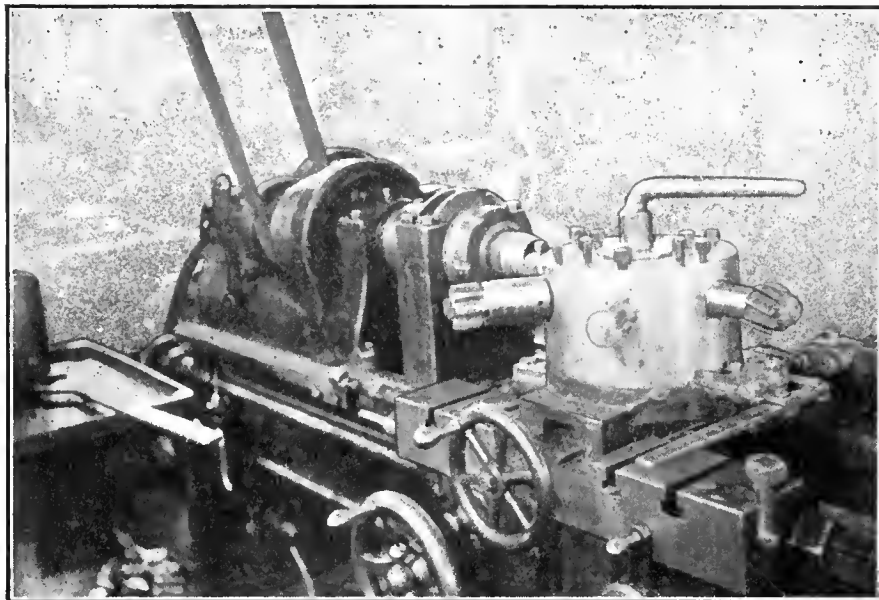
FINISHING INSIDE OF SHELL NOSE ON A LONDON MACHINE TOOL CO. LATHE.
